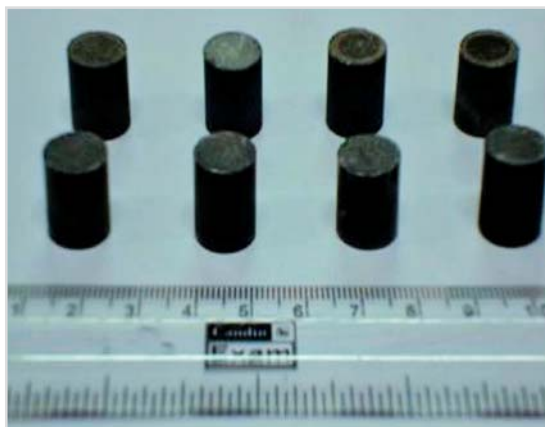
Photograph showing hot pressed thermo-elements with contacts
